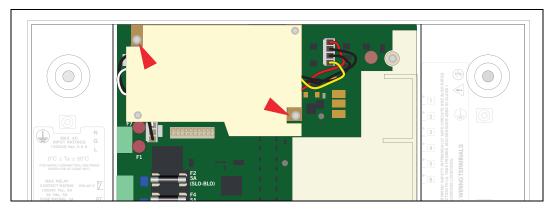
Remove Two Corner T10 Screws From Power Supply Board
